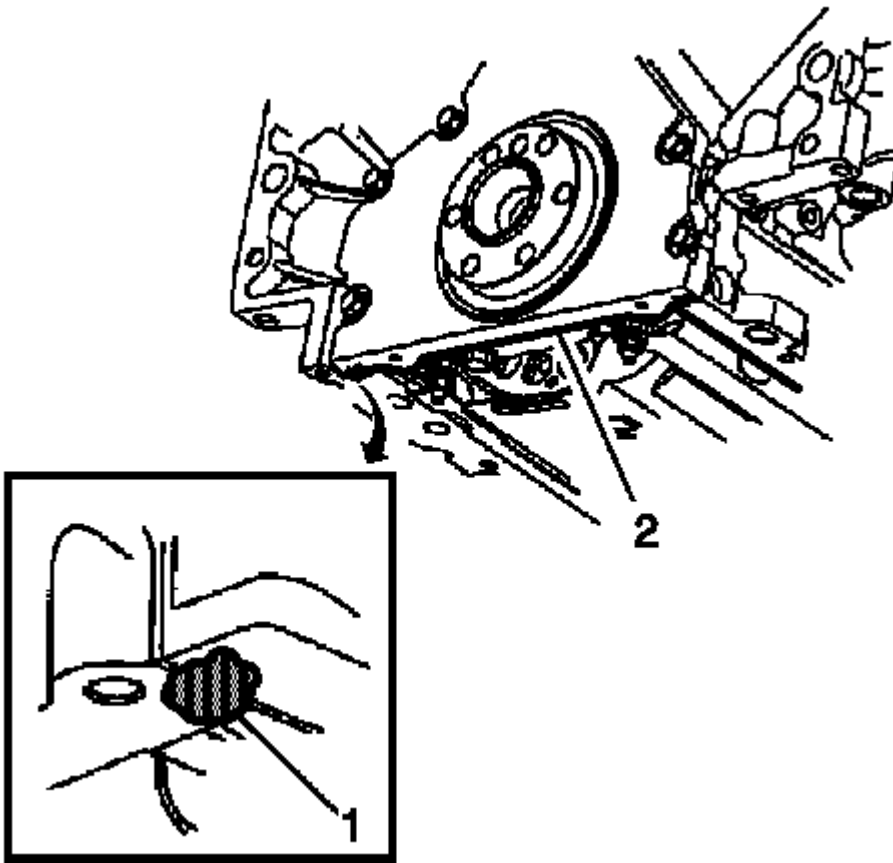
View Of Sealant Applied To Rear Oil Pan-To-Engine Block Junction
